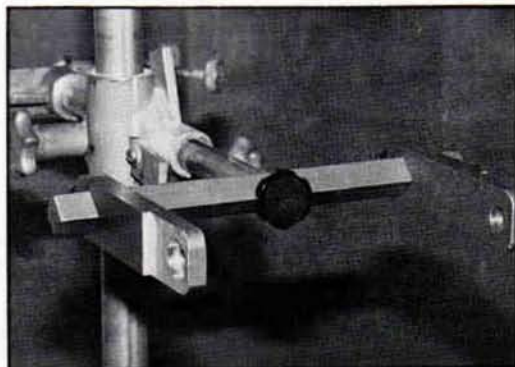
Modified alignment jig mounted in the Vertical Fabrication Machine.
